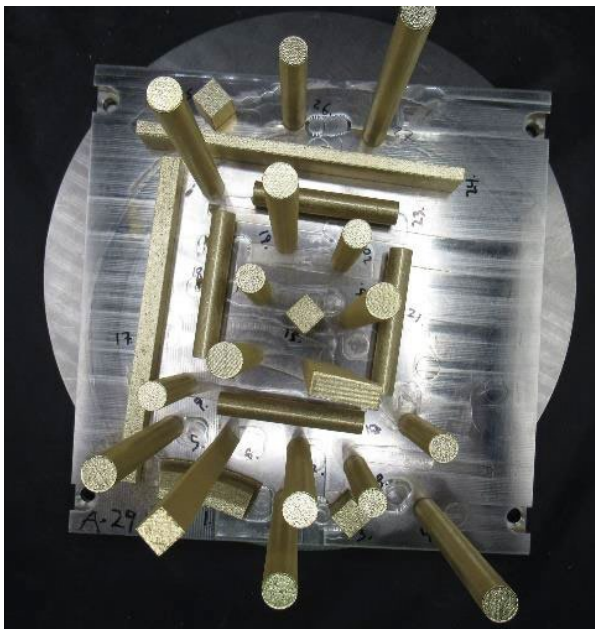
Photograph from above of as-printed aluminum bronze samples on build plate.
